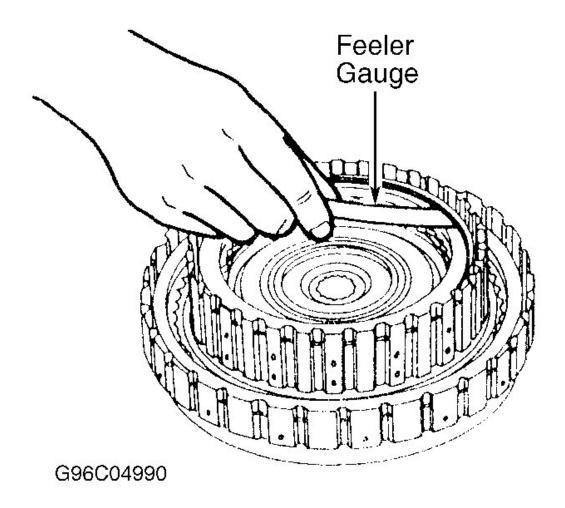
Measuring Coasting Clutch Clearance Courtesy of MAZDA MOTORS CORP.
